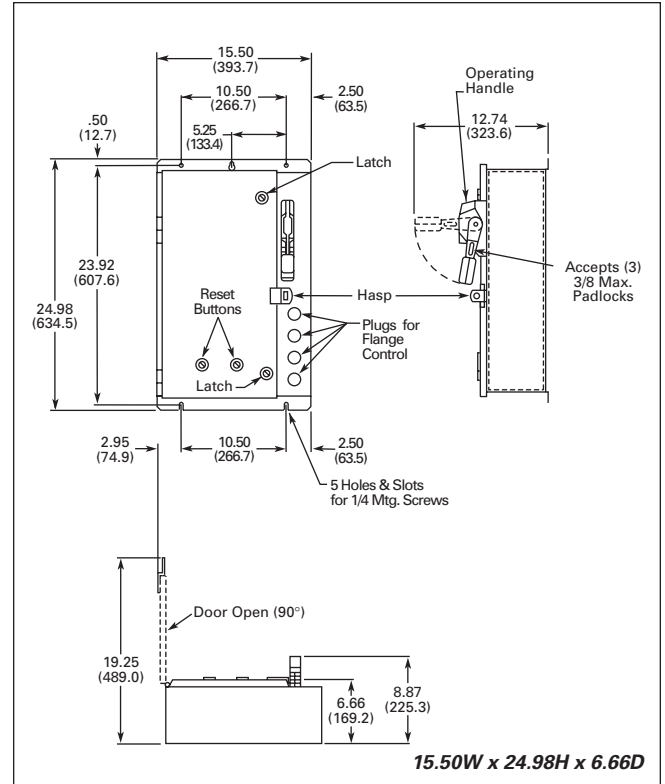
Box B, Type 12 — Approximate Dimensions in Inches (mm)
